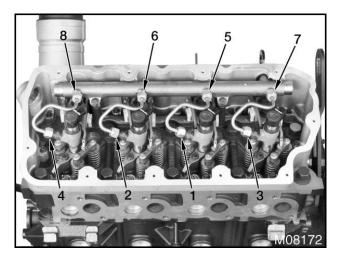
Fuel rail to injector tube assemblies tightening sequence (typical)
